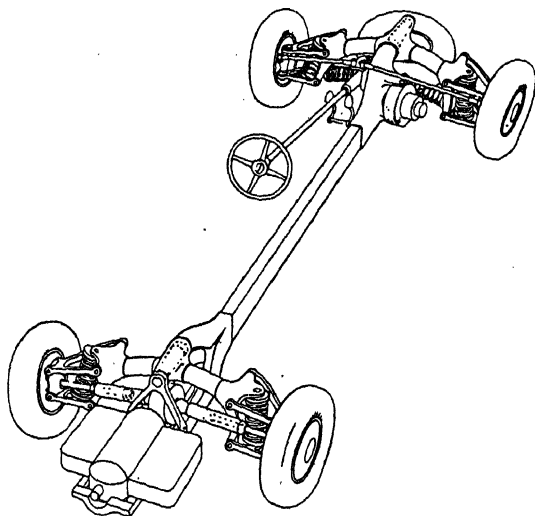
"Backbone" Chassis for Rear Engine Drive and Independent Wheel Springing.
